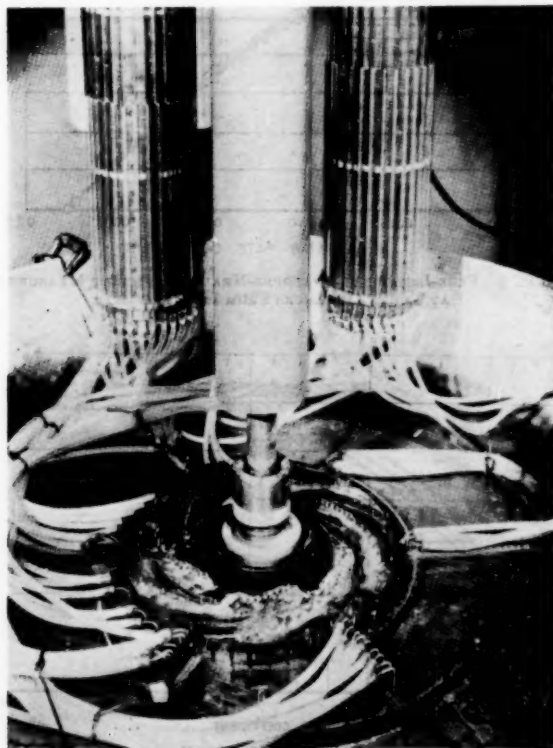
ASSEMBLY OF PUMP COMPONENTS
